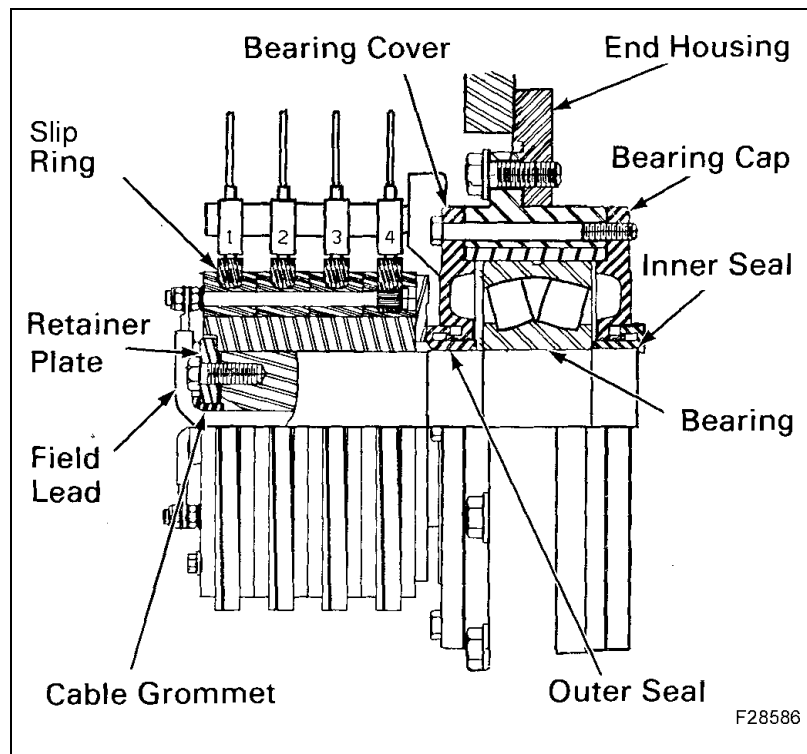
Bearing and Collector Ring Assembly Cross-Section
